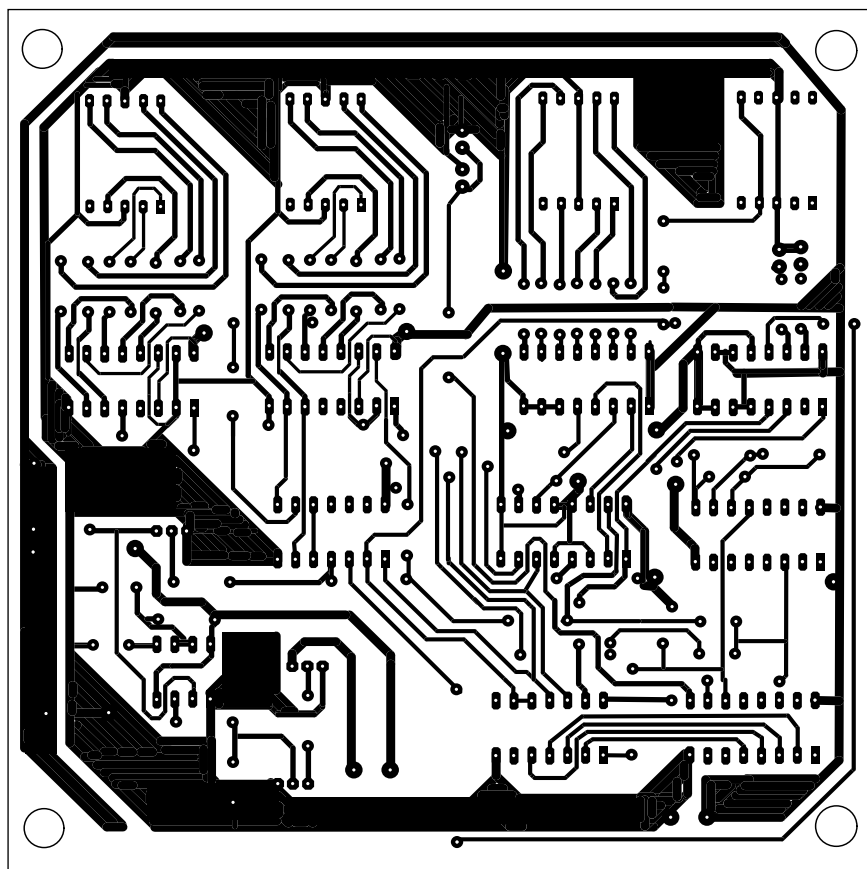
Actual-size, single-side PCB layout of the digital clock
